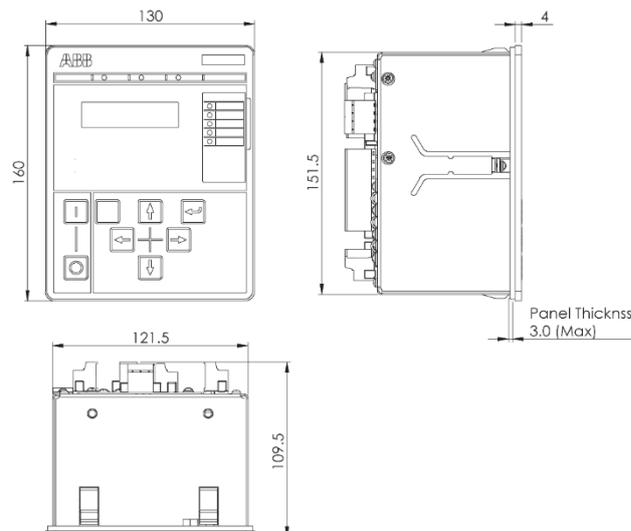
Dimension of REF601/REJ601 – Flush mounting sensor
